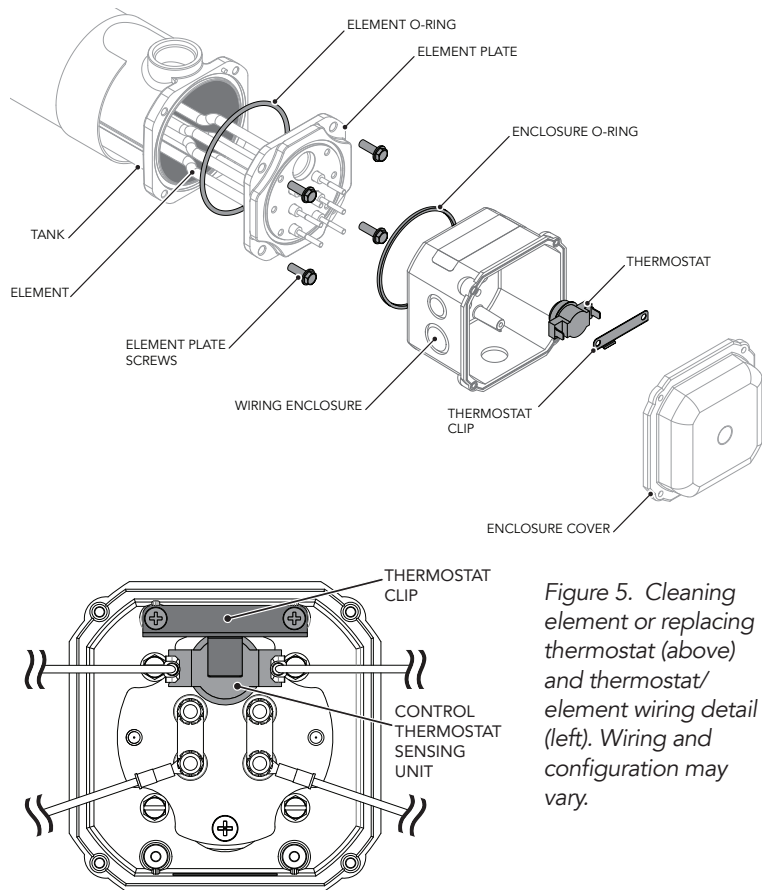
Cleaning element or replacing thermostat (above) and thermostat/element wiring detail (left). Wiring and configuration may vary.
